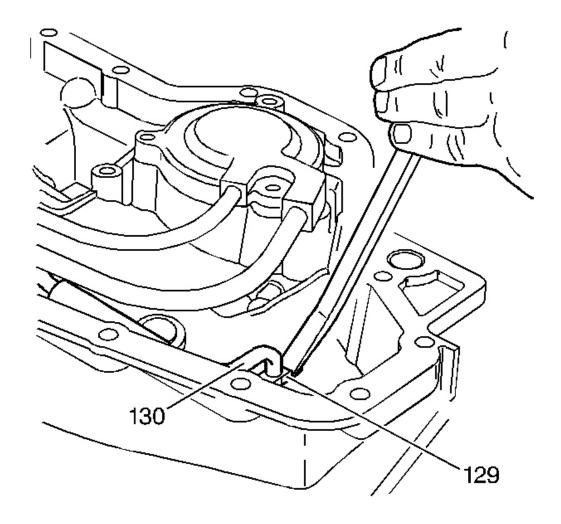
Prying Out Lube Oil Pipe Retainer Courtesy of GENERAL MOTORS CORP.
